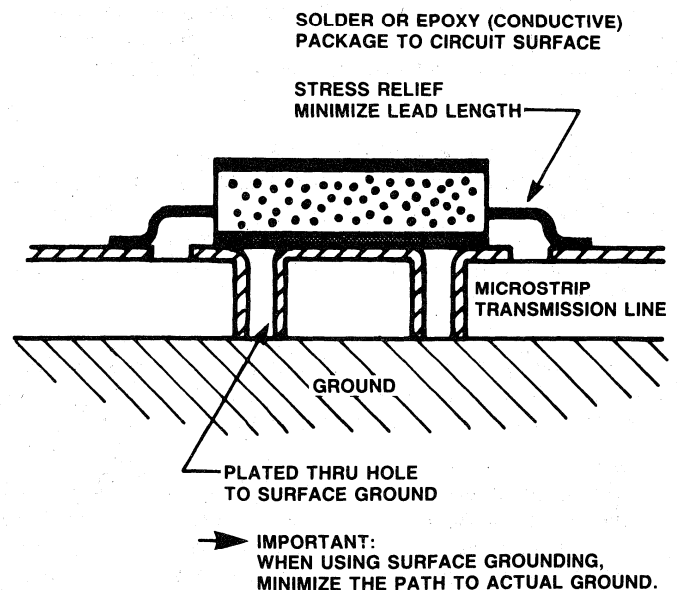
Surface Mounting 2000 or Flat Pack Packages
